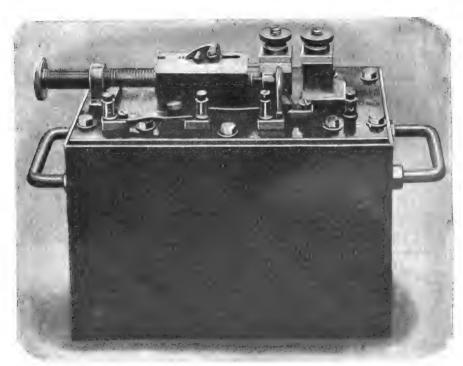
SMALL ELECTRIC WELDING MACHINE.
